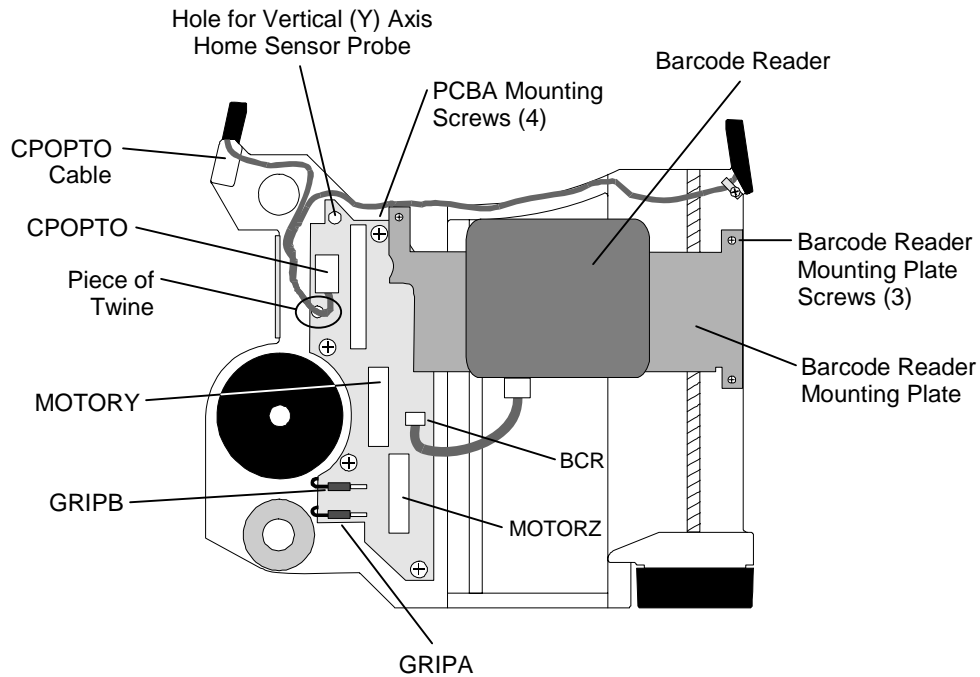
Carriage PCBA (Single Bay Handler Bottom View)
